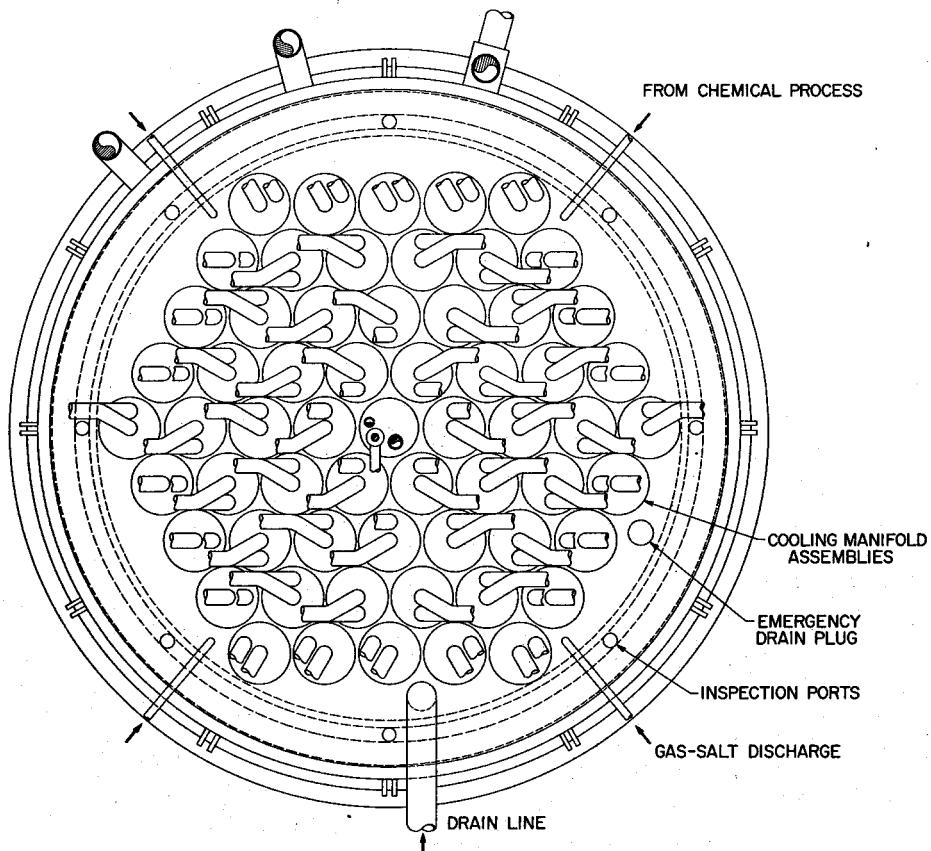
Plan view of top of drain tank showing new thimble arrangement.
